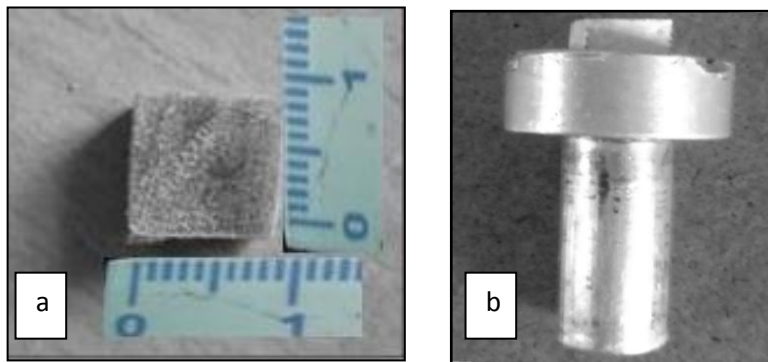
Sample for the wear tests (a), mounted on a fixture (b)
